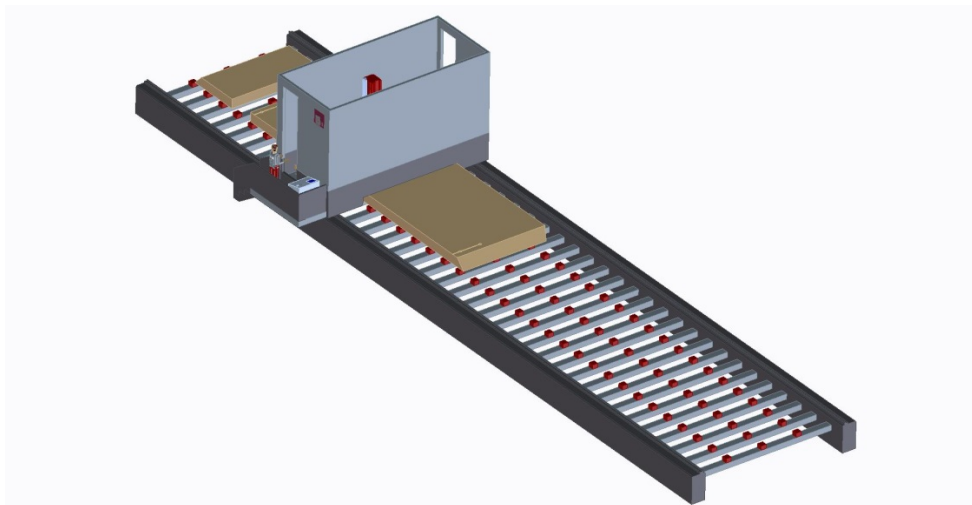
Line layout Stage IV, multiple processing center for CLT trimming and matching. Courtesy of Fill GmbH.
